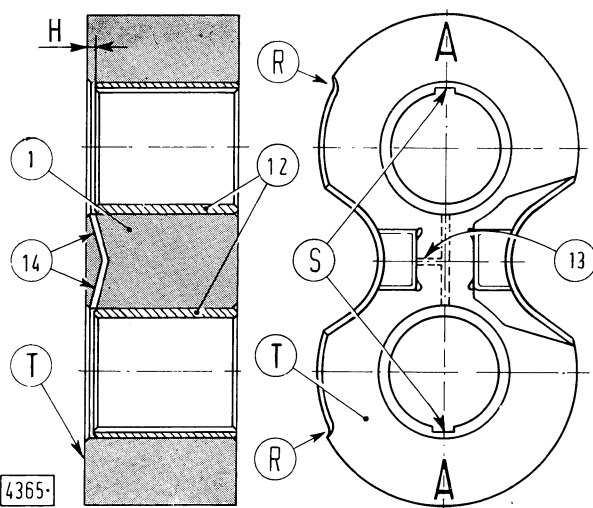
Pressing the Bushes into A.M. and P.M. Pump Supports
